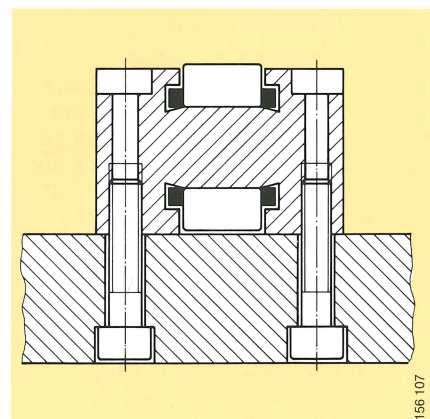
Fixing screws fitted through the machine component and fixed into threaded holes in the linear roller bearing
